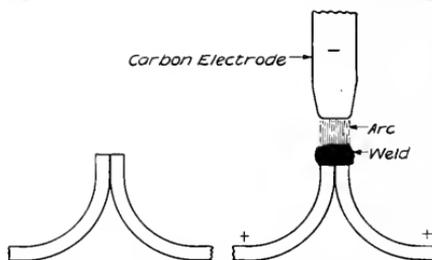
Sketch showing Method Employed in Joining the Edges of Metal Sheets
